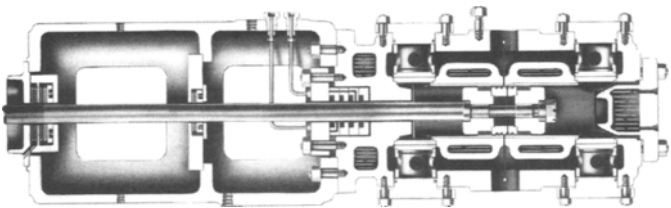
T. Medium- or high-pressure, double-acting cylinder with flanged liner. The liner is locked in place by a flange between head and cylinder barrel. A step on the liner O.D. permits easy insertion. The cylinder may be made of cast-iron, nodular iron, or cast steel, depending on operating pressure. Note: Optional two-compartment distance piece (type D) designed to contain flammable, hazardous, or toxic gases is illustrated. (Used by permission: Bul. 33640, June 1985. ©Dresser-Rand Company.)
